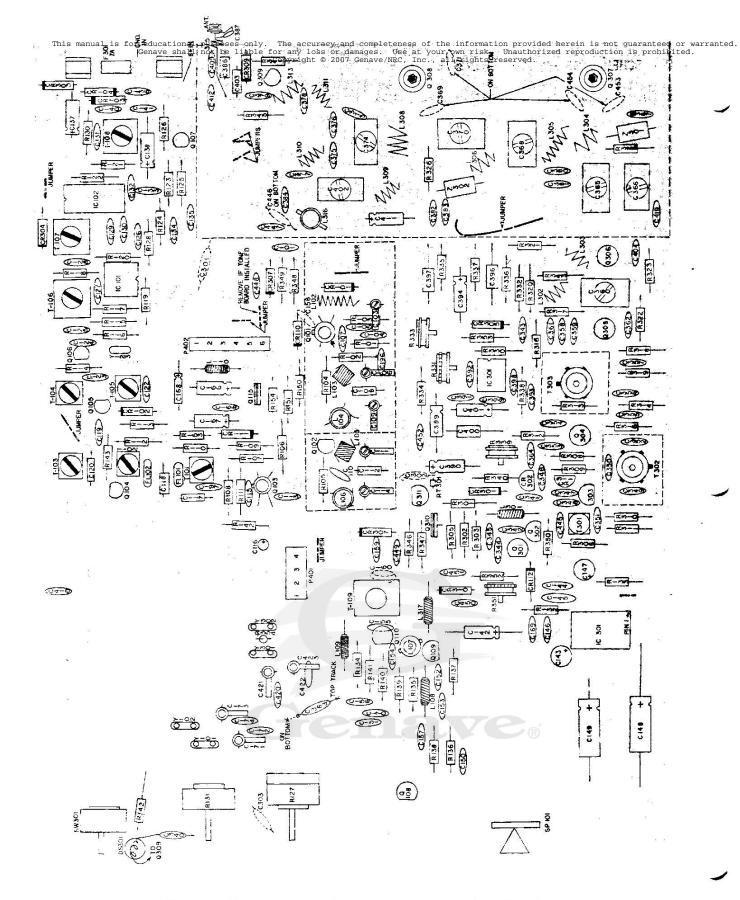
Main Board Component Layout (1-24-80) (Top View)
